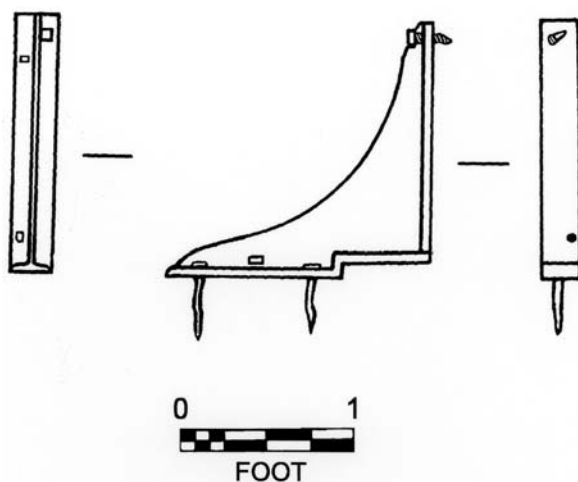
Side and end views of boiler saddle. Drawing by Jim Bradford
